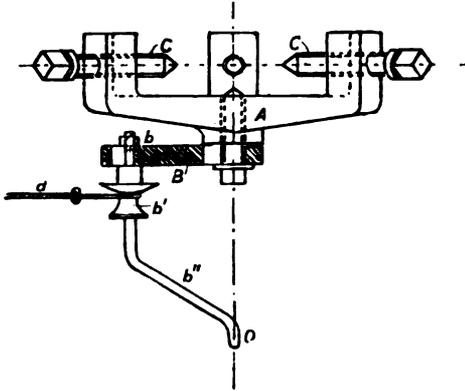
Mathot's patent "Claw" Reducing Gear.
